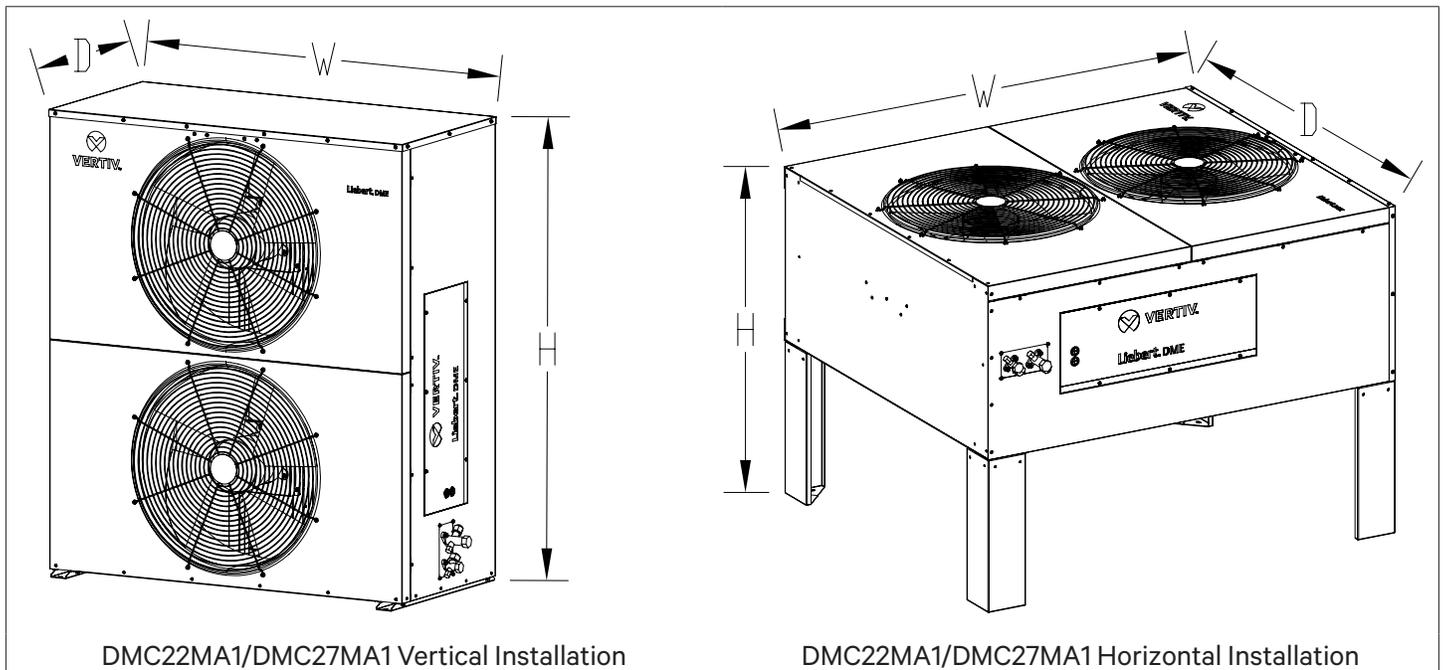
Dimension of Standard Outdoor Unit (22 kW and 27 kW)
